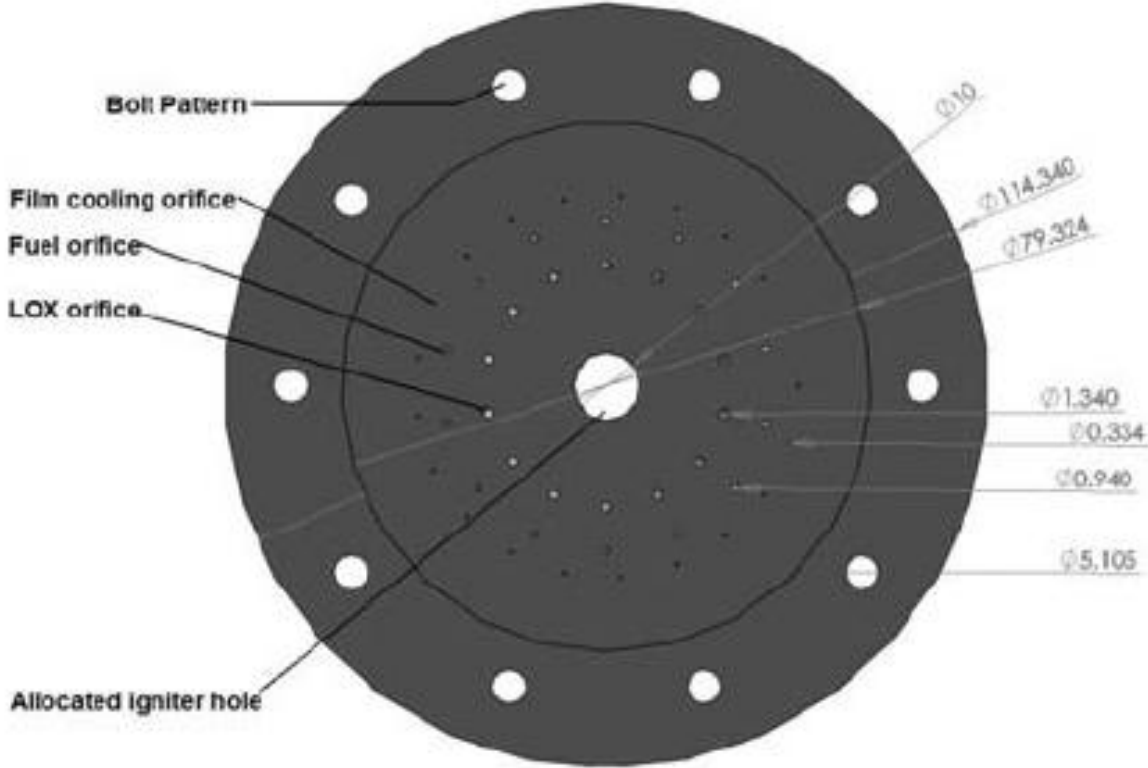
Injector Bottom plate showing orifices. Dimensions in mm
